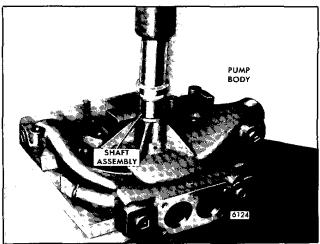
Installing Shaft and Bearing Assembly Using Tool J 29189-A
